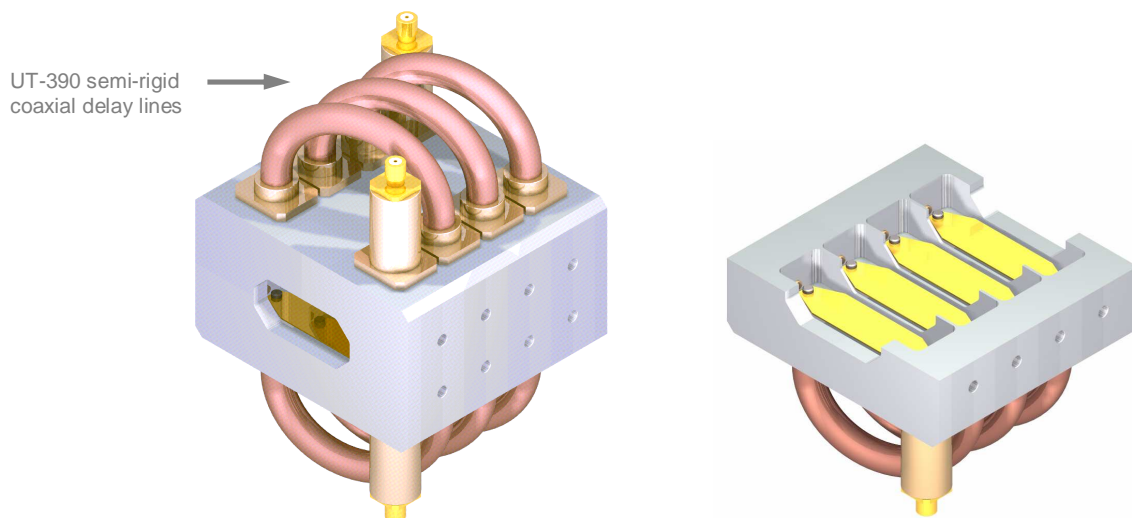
RAL Helical B2 / Short length prototype / CAD view
